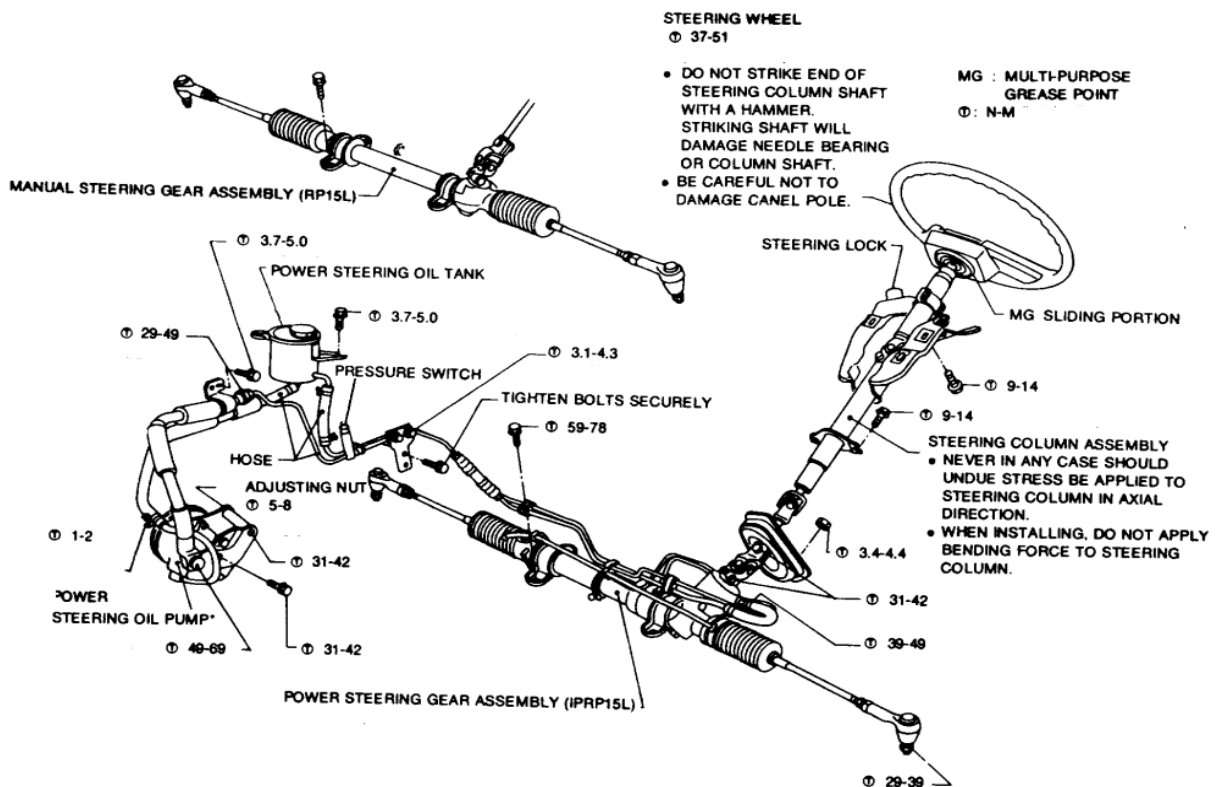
Hydraulic Power steering gear with applicable torque and lubrication
